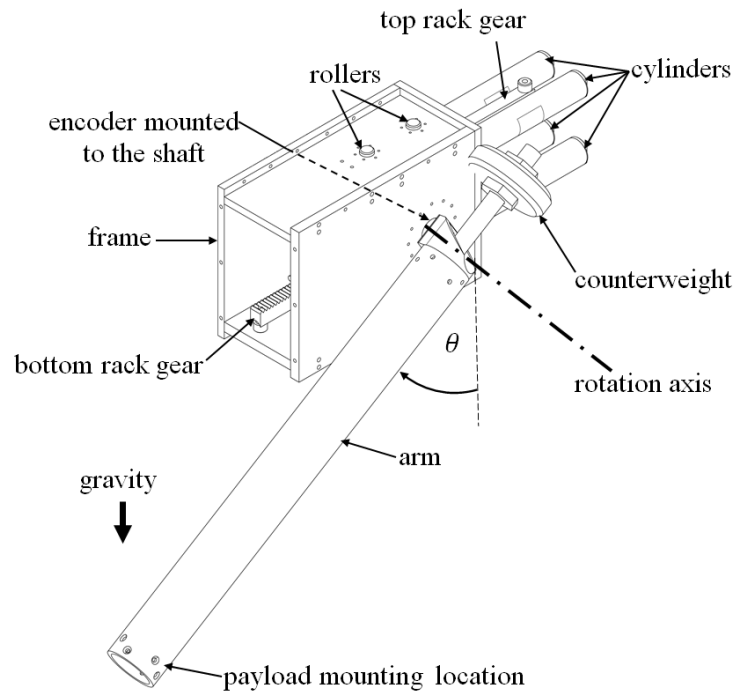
Assembly drawing of the pneumatic rotary actuator and arm.
